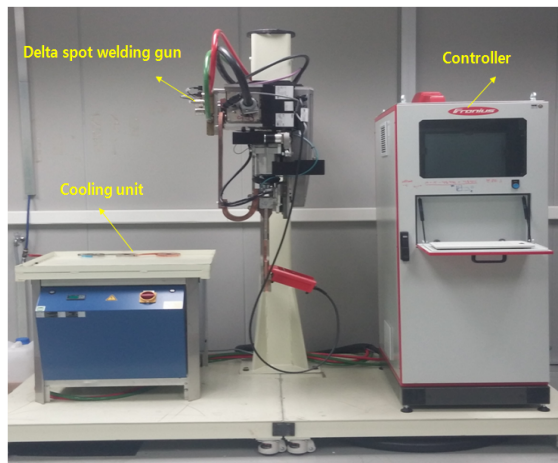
Delta-spot welding systems employed in the experiment.
